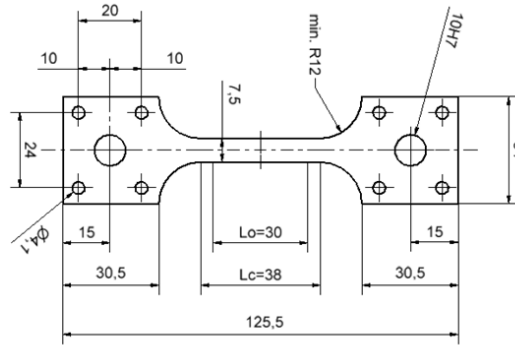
Geometry und dimensions (in mm) of the specimens. Thickness $t = 1.2$ mm.
